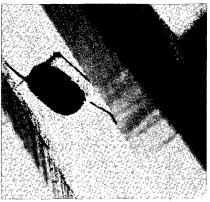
Burrs on left side of center rail pins. Burred pins can be replaced, pulled out and put in upside down, or pulled out and put in again so that the bushing has no contact with the burred surface.
